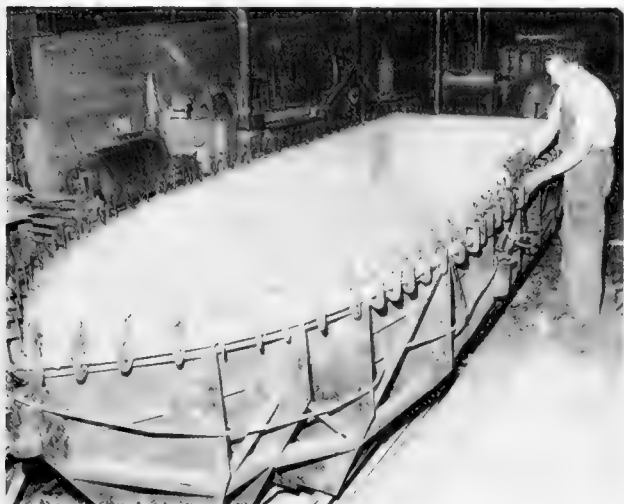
Rubber blanket in position over fiberglass lay up (Courtesy Universal Molded Products Corporation)
